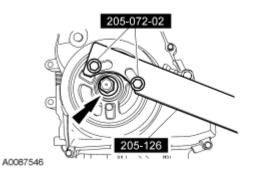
Assembling Special Tools (205-126 And 205-072-02) And Hardened Washers Courtesy of FORD MOTOR CO.
